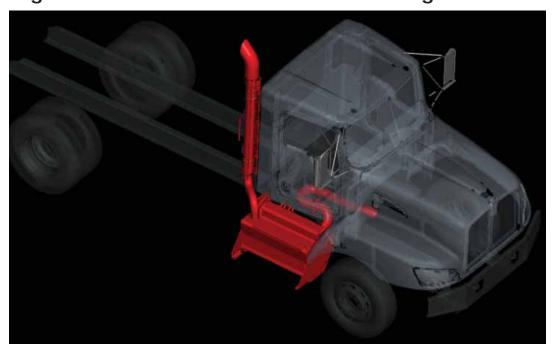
Isometric View of Right Hand Under DPF and SCR with Single Back of Cab Tailpipe
